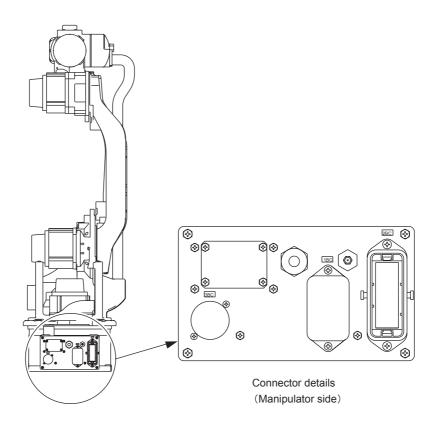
(a) Details of the Manipulator Cable Connectors (Manipulator Side)
